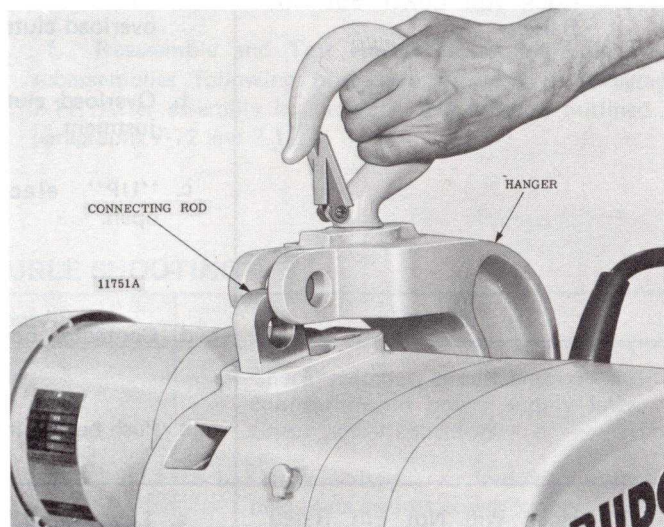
3 Ton Hanger Bracket Connection Pin Removed
